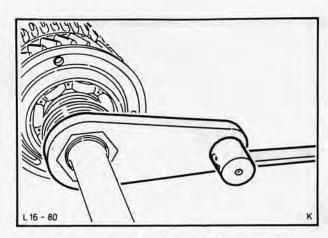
Torque nut to specified value with Special Tool No. 16–027
